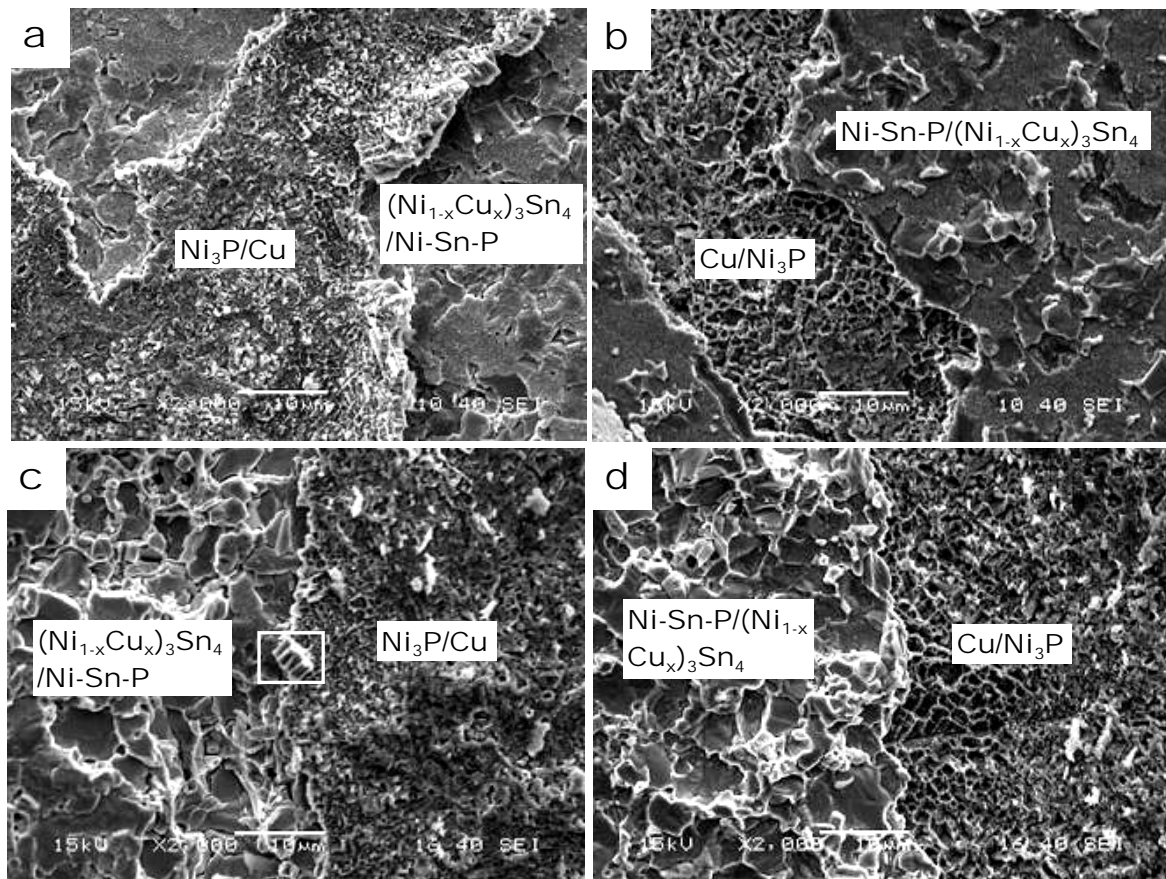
Fracture surfaces of the aged samples having thin ($3.9\ \mu\text{m}$) Ni-P layer and aged at $160\ ^\circ\text{C}$ for (a) 100 h (solder side), (b) 100 h (Cu side), (c) 400 h (solder side), and (d) 400 h (Cu side). Fracture surfaces are at the $(\text{Ni}_{1-x}\text{Cu}_x)_3\text{Sn}_4/\text{Ni-Sn-P}$ and $\text{Ni}_3\text{P}/\text{Cu}$ interfaces.
